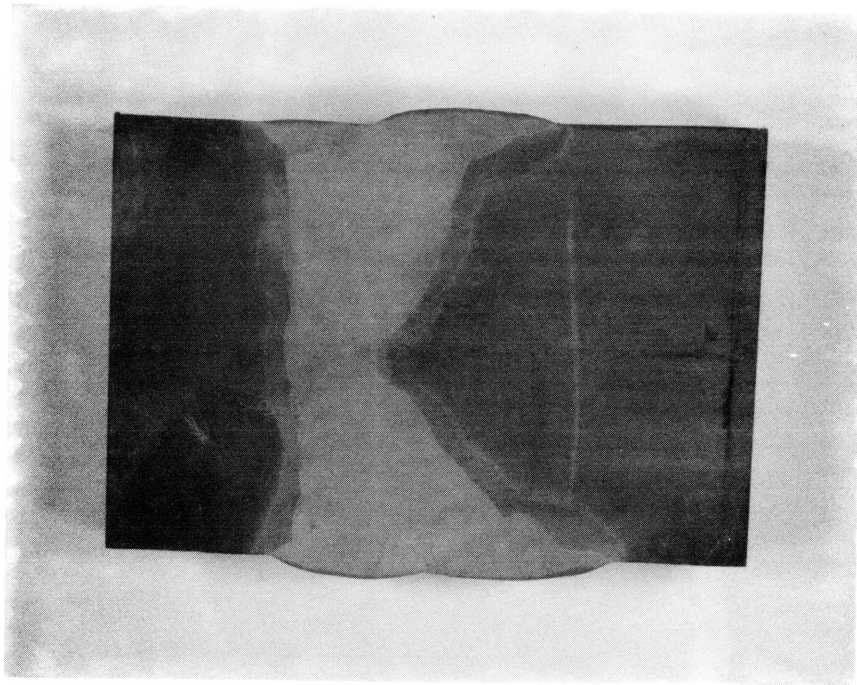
Macroscopic Etched Surfaces of Gas Metal Arc (GMAW) and Submerged Arc (SAW) Welds.
